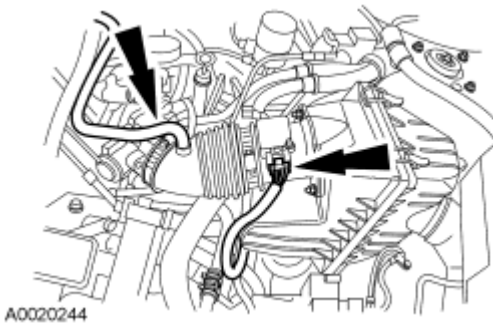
Locating Breather Tube & Mass Air Flow (MAF) Sensor
